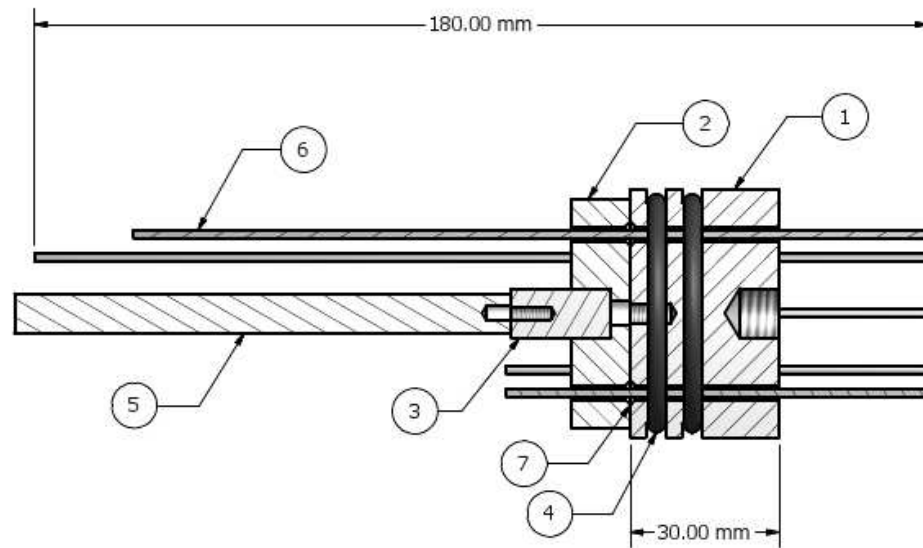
Schematic of the strand holder. (1) Stainless steel closure. (2) POM insulating disc. (3) Fixture bolt for propellant strand. (4) O-ring. (5) Propellant strand. (6) Stainless steel rod. (7) Epoxy joint.
